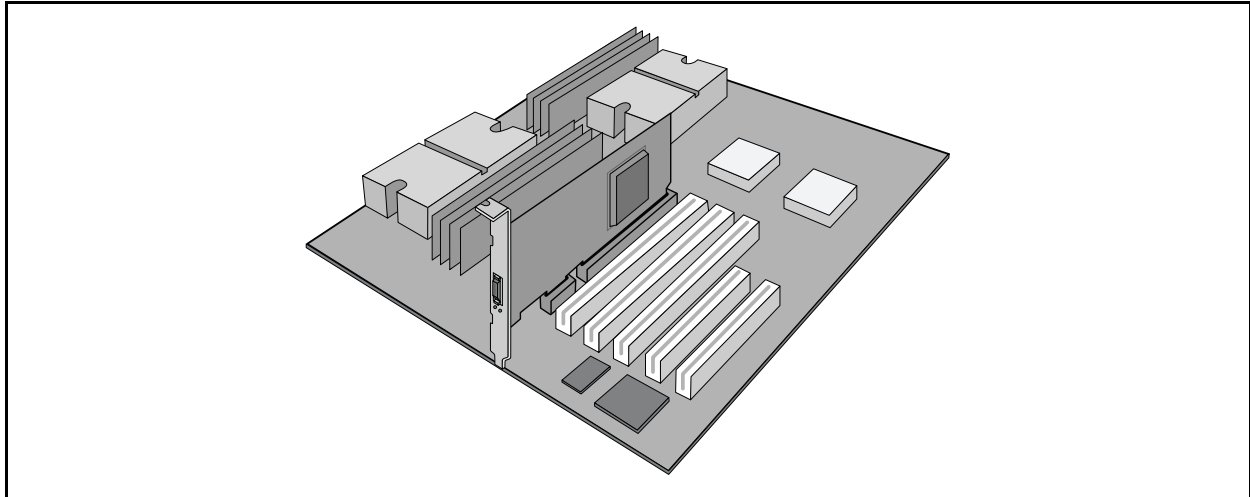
QHT7140 Without Riser Installed in a 3U Chassis
